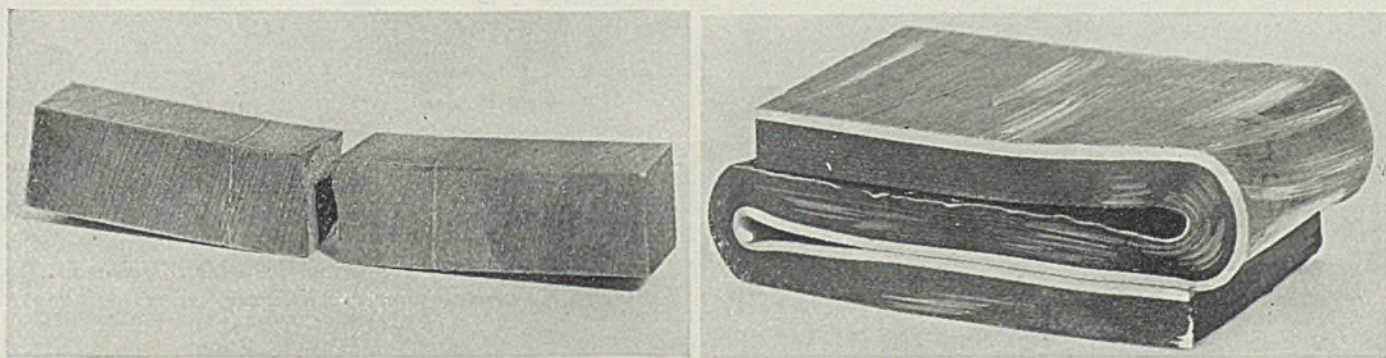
(left)—High-speed steel duo-welded between 4 and 6 per cent chromium steel, fractured through the high-speed steel, welds remaining intact. Fig. 7 (right)—Cold bend test on iron clad with 18-8 chrome-nickel steel, showing no weld rupture
